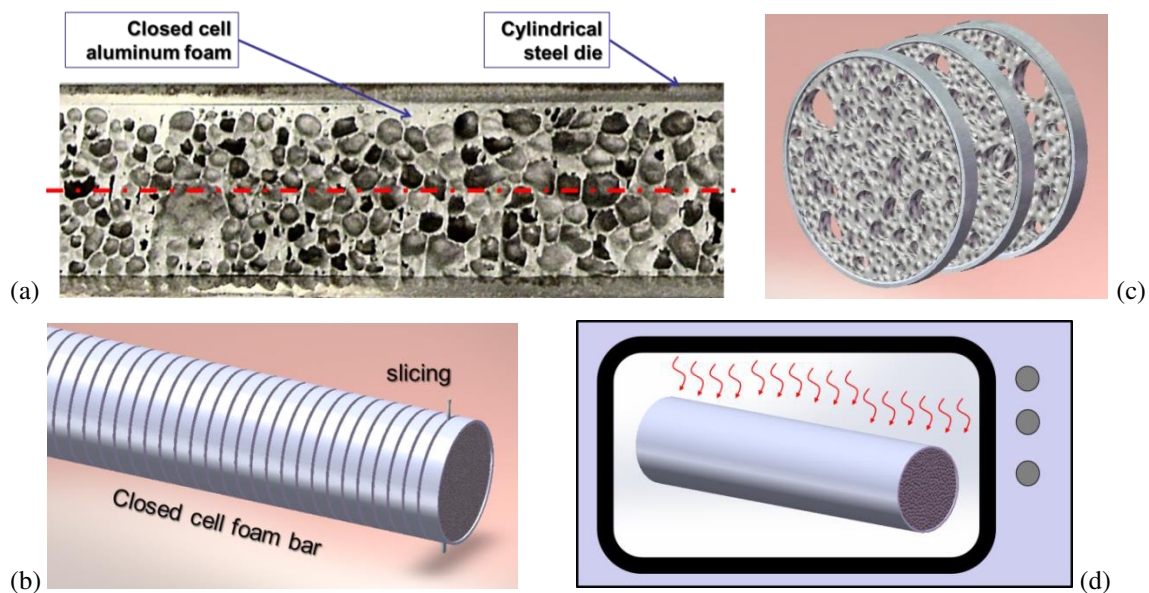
Axial cross section of a closed cell aluminum sample, foamed inside a cylindrical steel die by expansion of a foaming agent (a); slicing of the closed cell foam bar (b); stacking the slices and inserting them inside an aluminum tube (c); solid state bonding of the slices and the tube inside a furnace (d)
